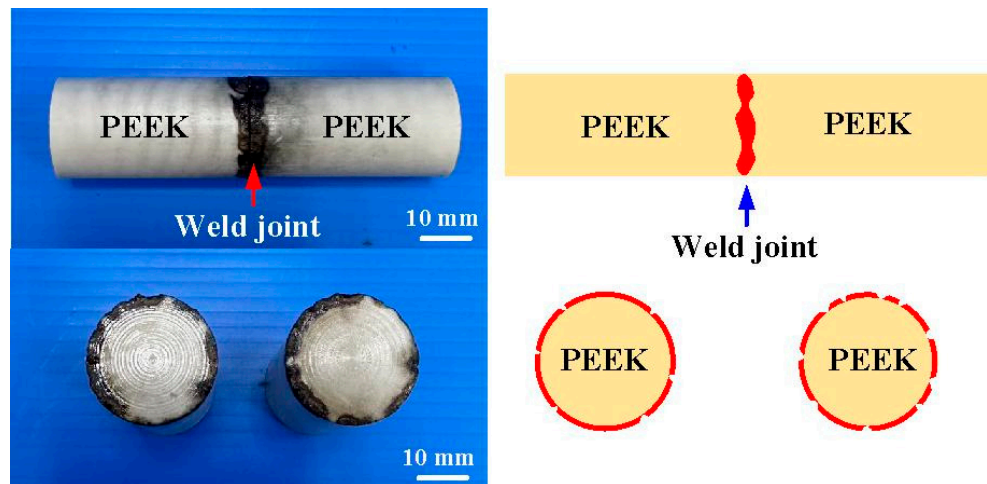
A typical welded part for laser welding of PEEK polymer rods.
